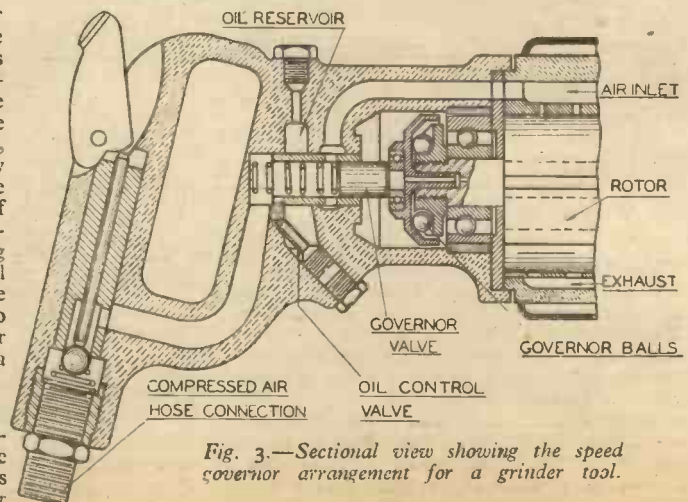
Sectional view showing the speed governor arrangement for a grinder tool.
